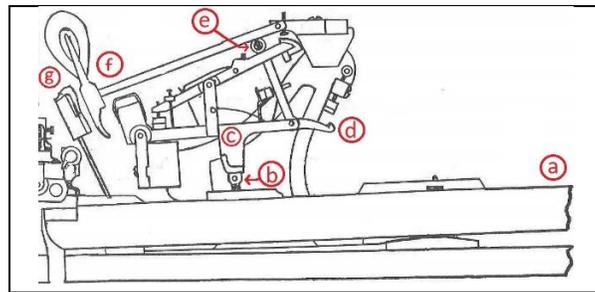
Grand piano action system. Labels have been added to highlight the parts of the mechanism active in the stages described in the text. (a) Key. (b) Capstan. (c) Whippen. (d) Jack. (e) Hammer knuckle. (f) Hammer. (g) Backcheck (Figure adapted from Comparetto, 2017).
